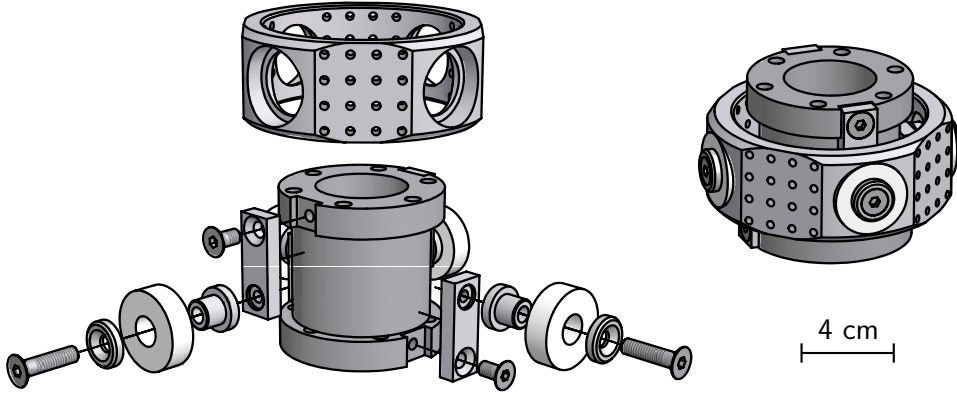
Vacuum Pivot exploded (left) and in assembled form (right).
